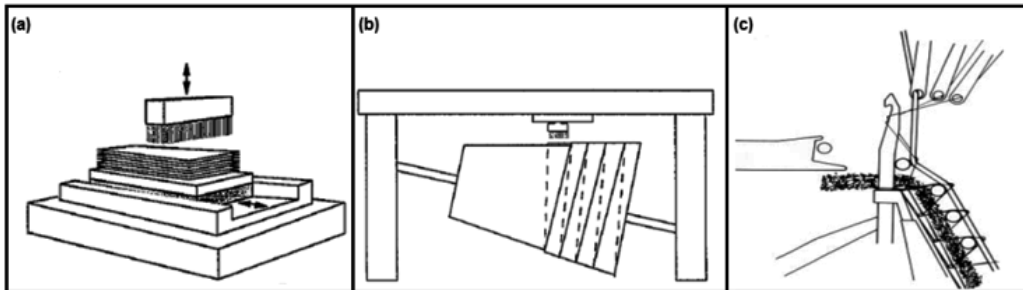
(a) 3D flat non-woven machine (b) 3D circular non-woven machine [80, 81] (c) Schematic view of 3D biaxially reinforced nonwoven structure made by warp knitting machine [57].
